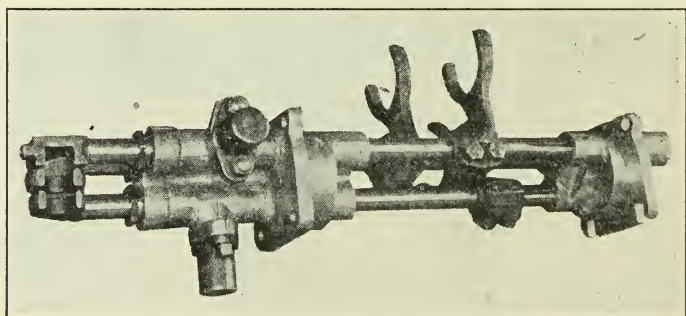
THE SHIFT-ROD ASSEMBLY OF THE FOUR-SPEED TRANSMISSION
